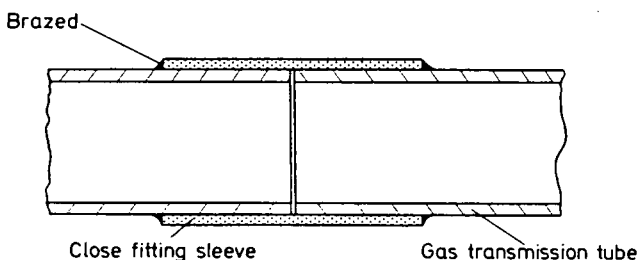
Method of joining metal gas transmission tubes using a close fitting sleeve and brazed joints
